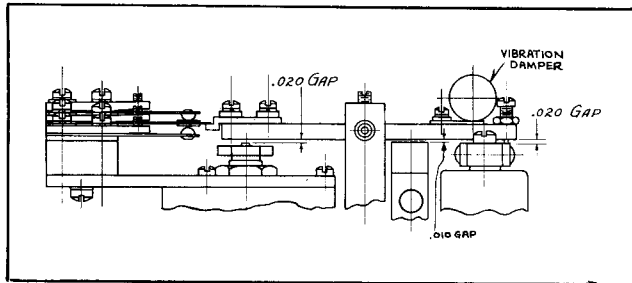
Sectional View of the Impedance Element Beam and Contact Assembly.
